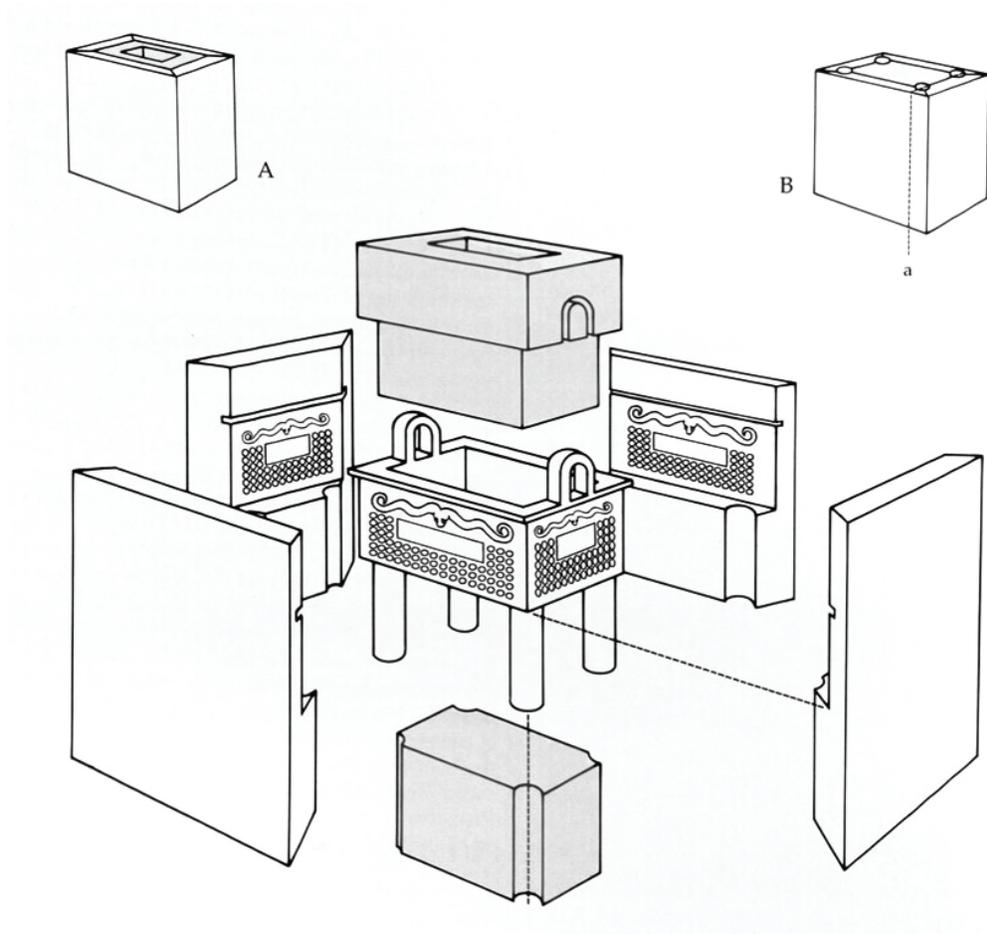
Mold pieces needed for casting a square vessel (fang ding). After Chase 1991, 24. Reassembled molds are shown in inset A; the assembly is inverted with legs up when the molten metal is ready to pour as shown in inset B.
